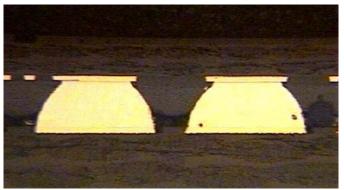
BGA 196/NC-7 Pb-Free Paste The joint exhibits excellent wetting to the PCB pad and minimal voiding.
